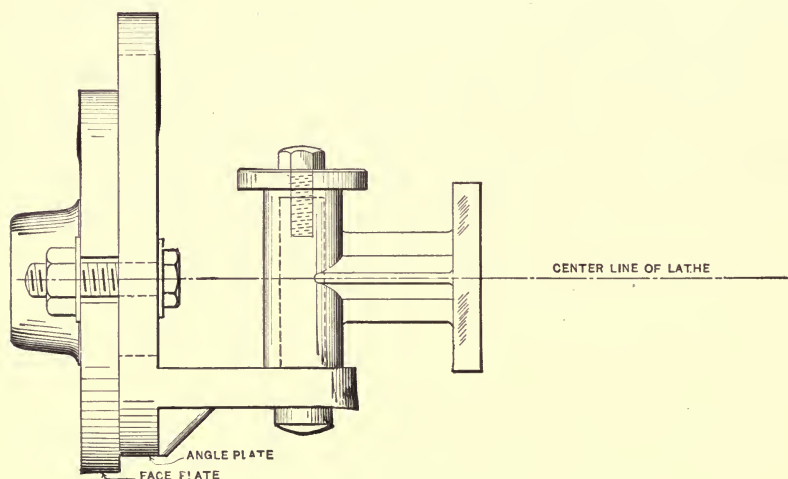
ANGLE PLATE AND FACE PLATE.
